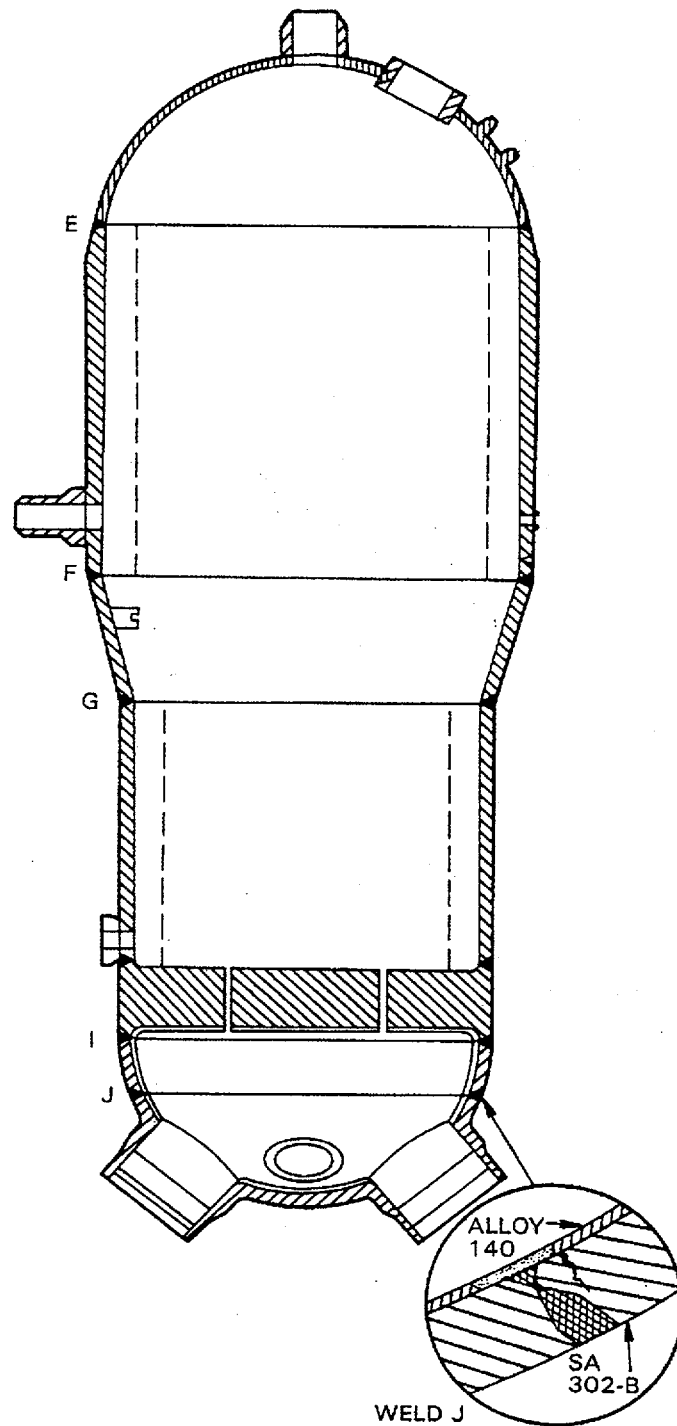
Location of Cracks in Weld J of the Garigliano Steam Converter – Cross Section
